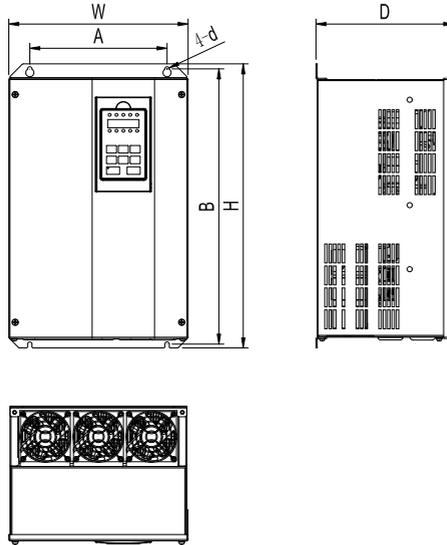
Outline, mounting dimensions for MV600J6B-4T30~MV600J6B-4T160
